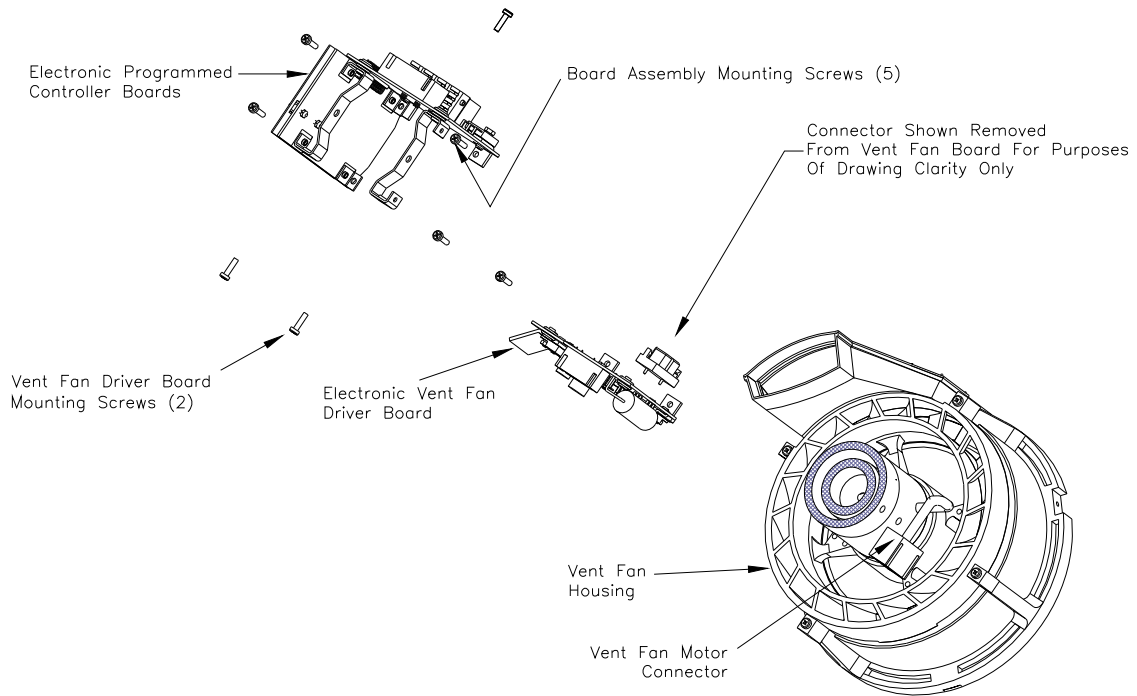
Detail, Removal of Printed Circuit Boards
